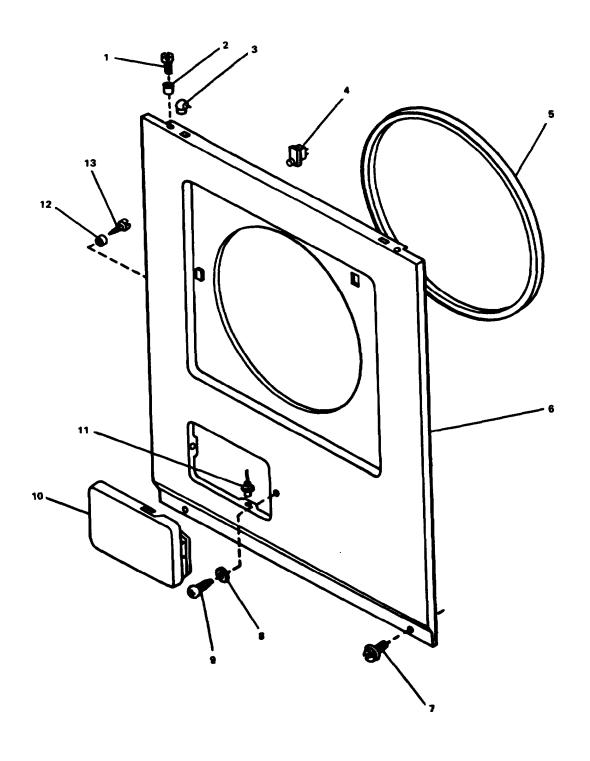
Dryer Front Bulkhead and Cylinder Assembly (Sheet 1 of 2).
